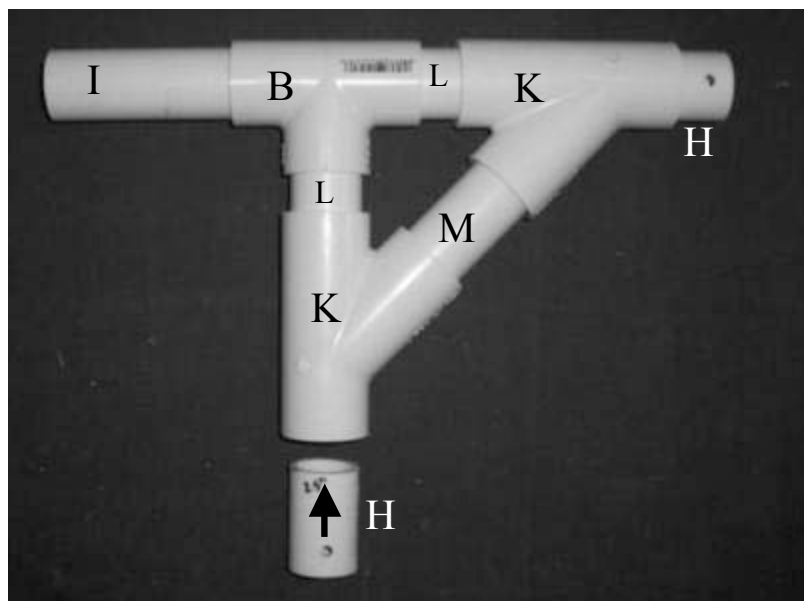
Step 8 – Wheelchair Side Frame.
